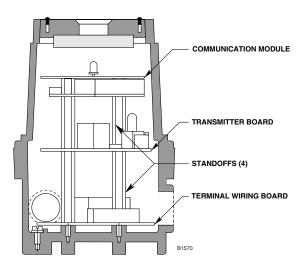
Printed Circuit Boards in Combustible Gas DCU
